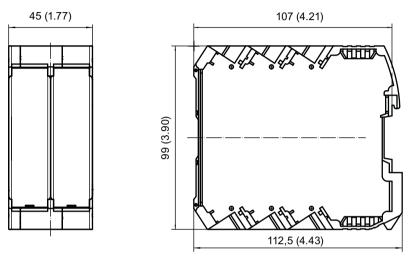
Dimension drawing of the SF Capacitor Module Top-Hat Rail, all dimensions in mm and (inches)
